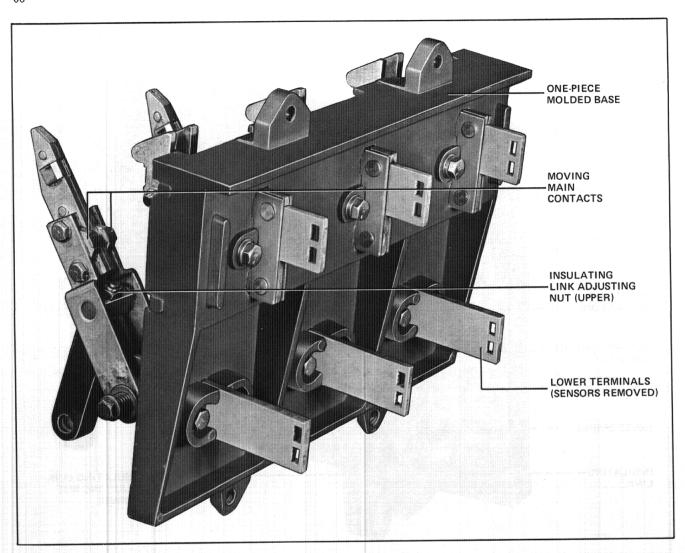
Type DS-206 Pole Unit Assembly - Rear View
